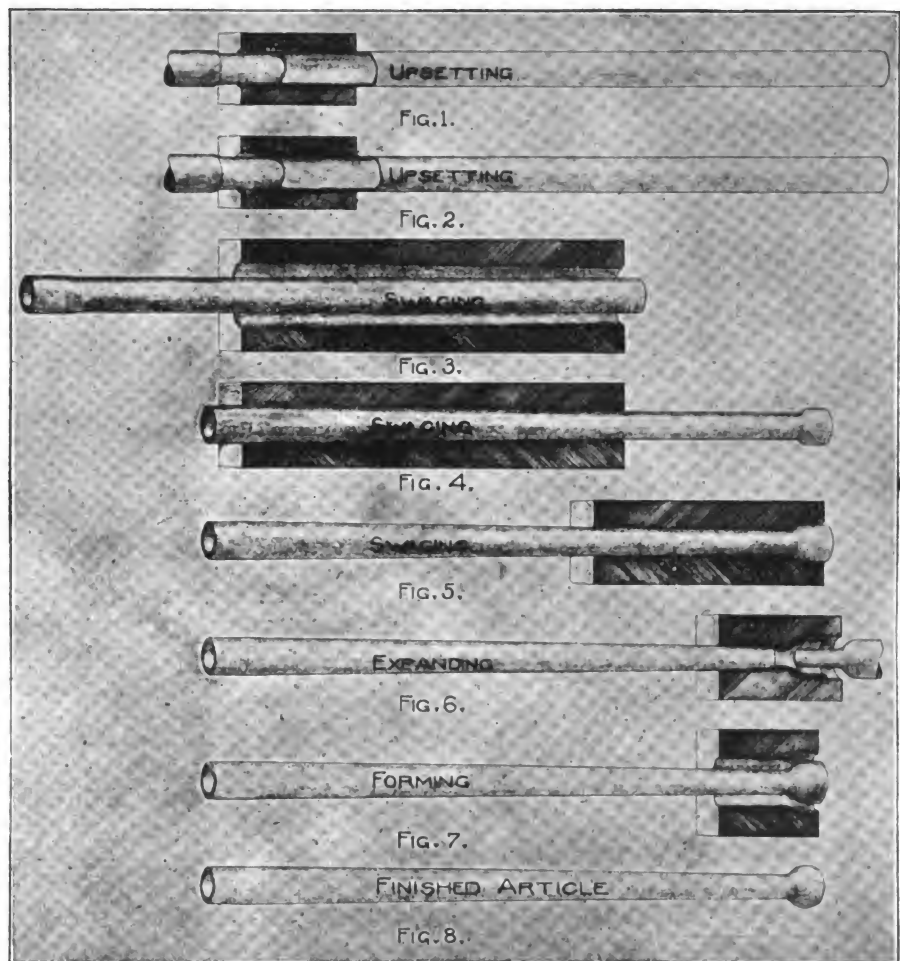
FIG. B—HOW A BALL AXLE TUBE IS FORMED FROM SEAMLESS STOCK
